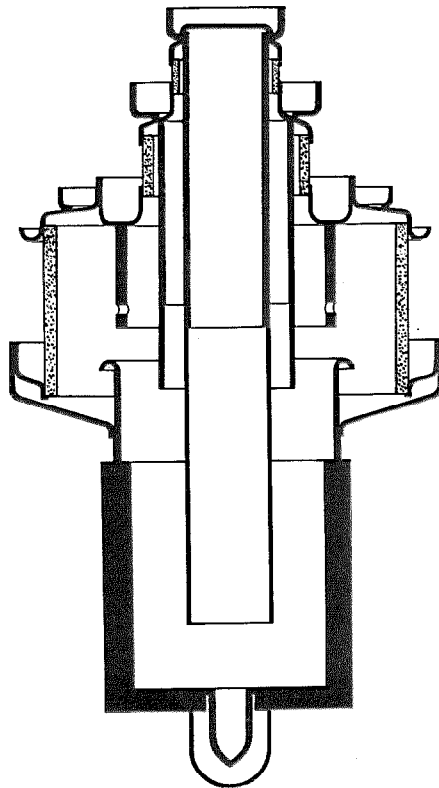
Cross section of the envelope structure of the *3JC/187E*.
